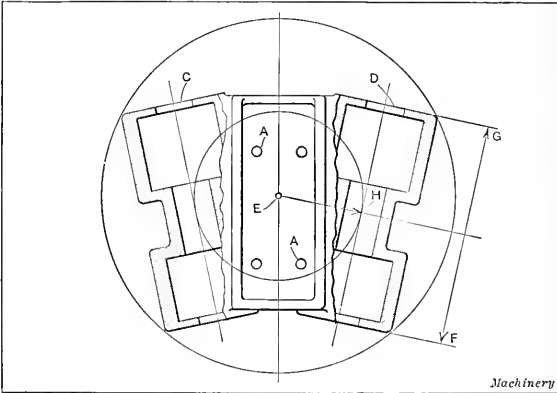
Roller Bearing Bracket machined with Fixture shown in Fig. 10
